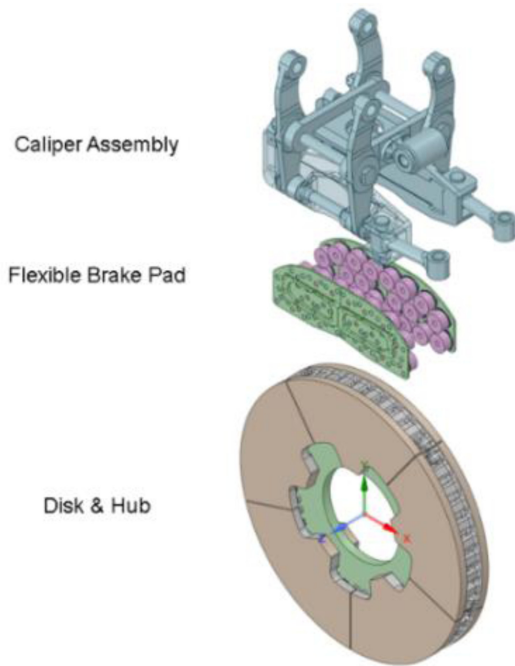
The picture of the brake system with the flexible pad which is composed of the caliper assembly, the flexible brake pad, the disk and the hub
